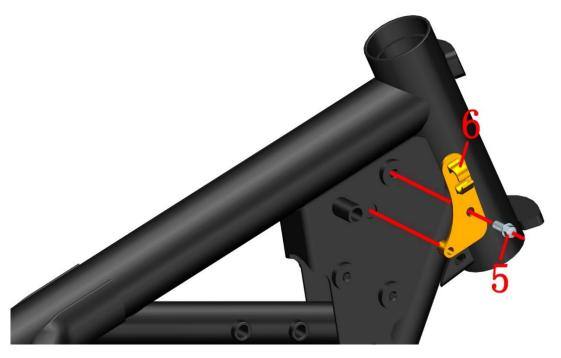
FRAME&ELECTRONIC COMPONENT		Frame plastic parts	CHK
